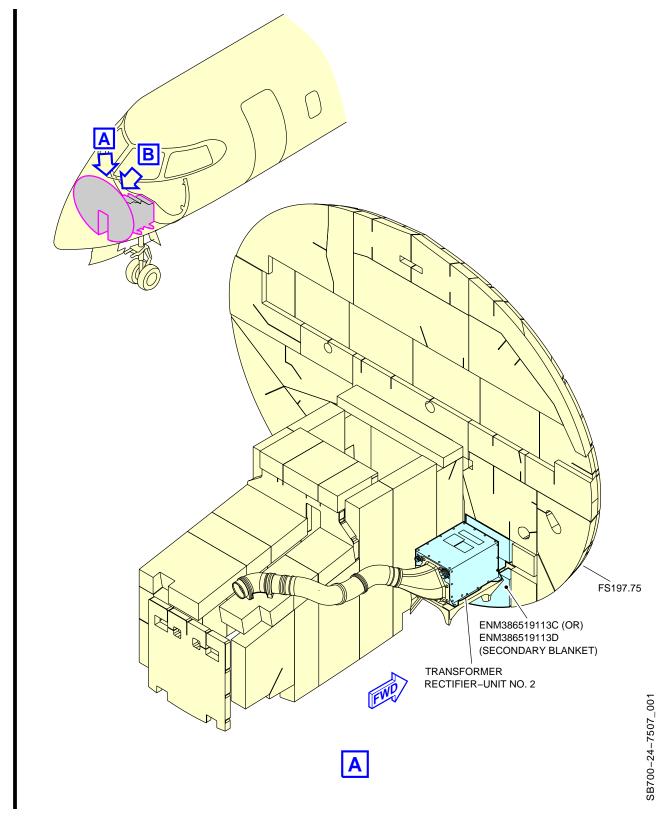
Removal and discard of the insulation blanket. (Sheet 1 of 2)
